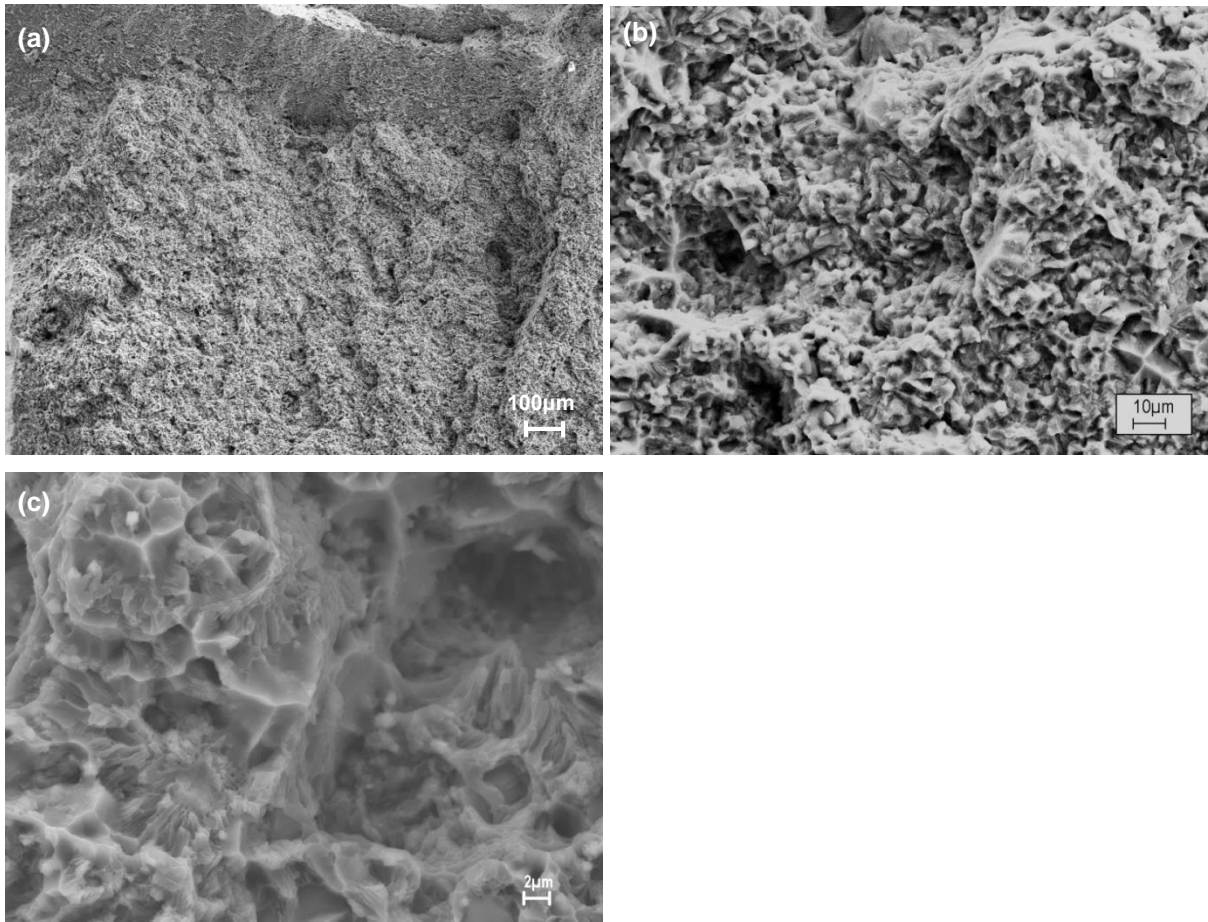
Typical fractographs on the cross section of 2.8×6.35 mm tensile sample machined from the trial castings (a) overall fractural image, (b) fracture surface at high magnification, and (c) detailed fracture.
